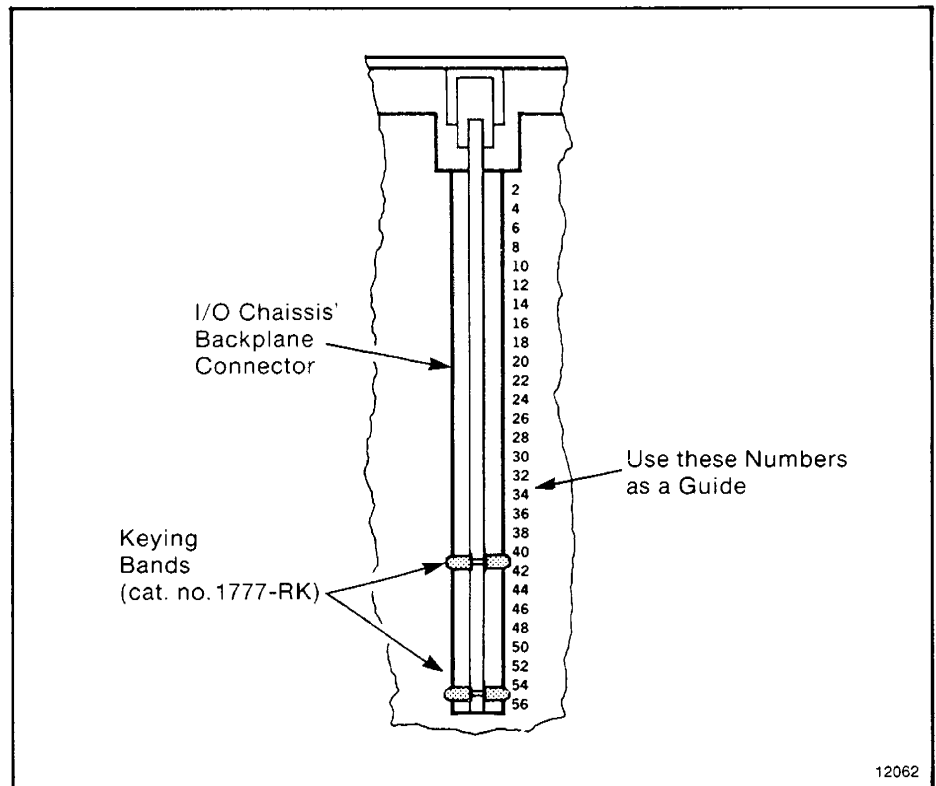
Place the Keying Bands on the Backplane of the I/O Chassis
